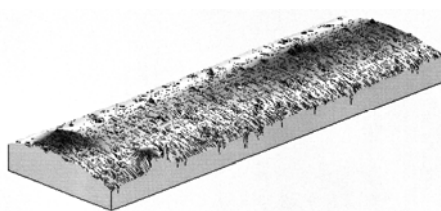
View of the 3D surface image of the iron-copper detail after sintering.
